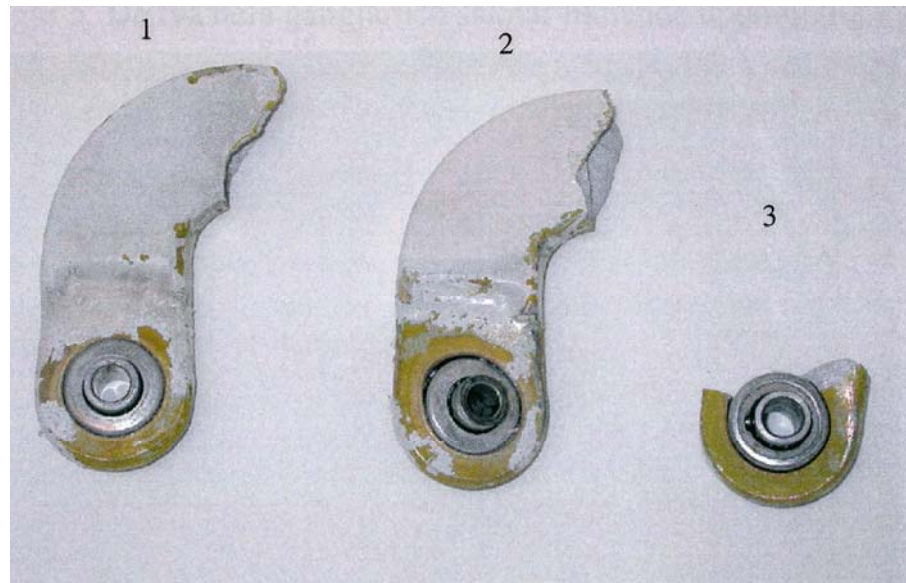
Broken front hinge assembly from the left main landing gear door (1). Front hinge assembly from the right main landing gear door (2). Rear hinge assembly from the right main landing gear door (3)
